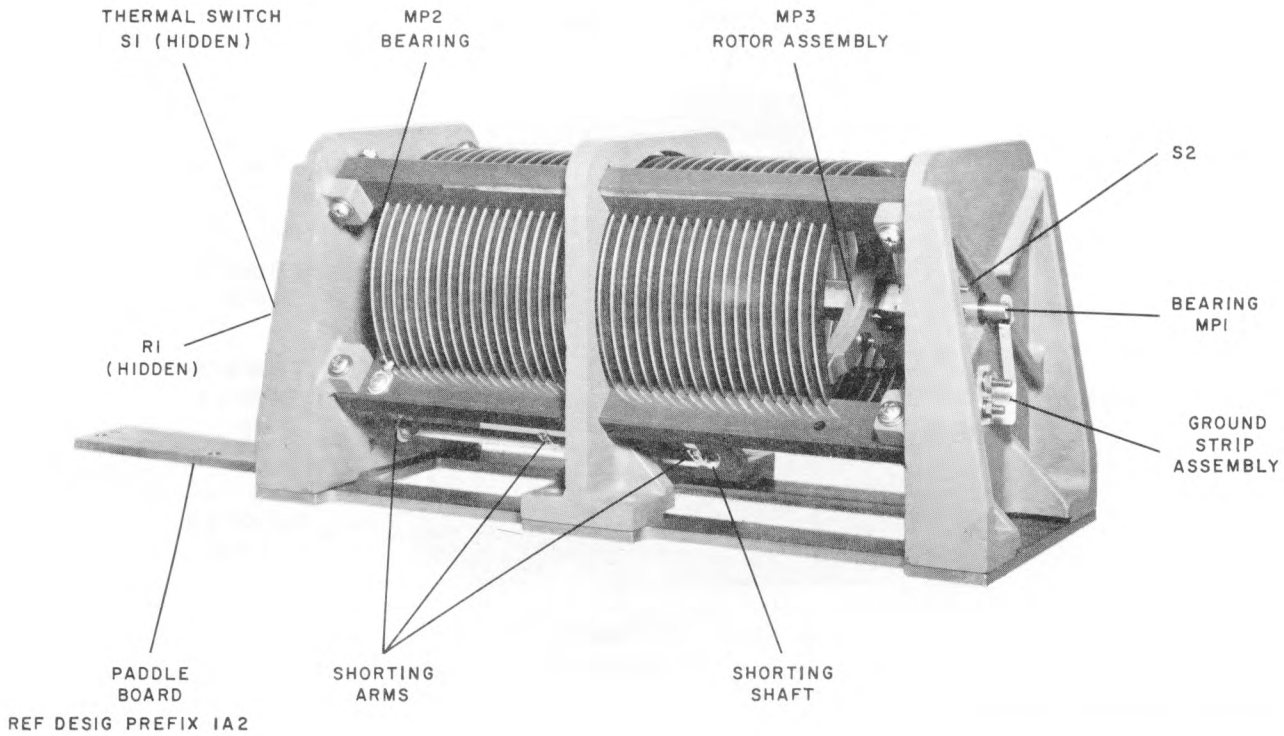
Inductor Assembly 1A2L1, Component Locations
